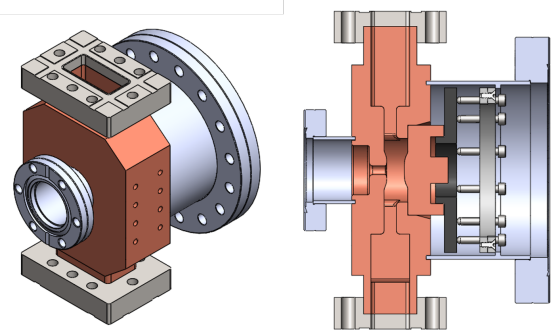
CAD design for fully fabricated 1/2 cell gun.
